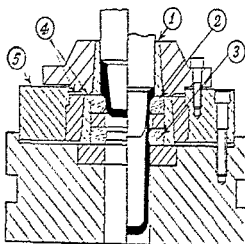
Typical forward-extrusion die with carbide inserts in a compression ring.¹
